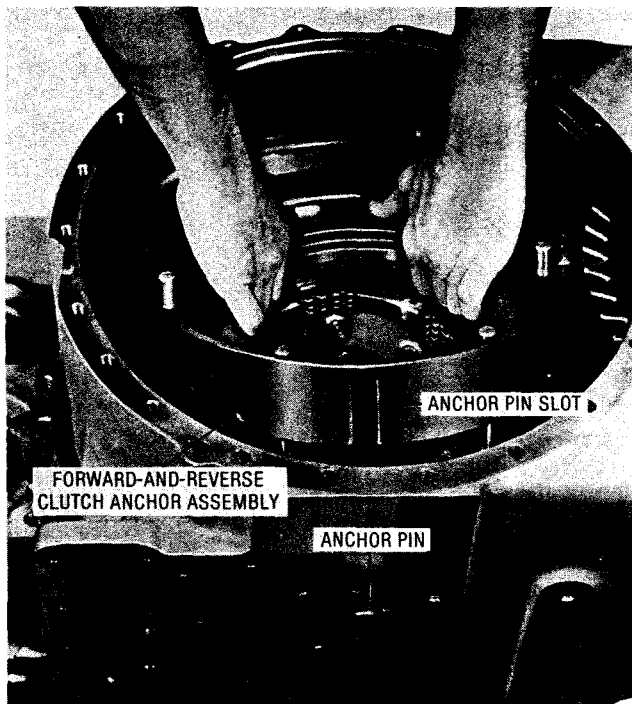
Removing forward-and-reverse clutch anchor assembly
